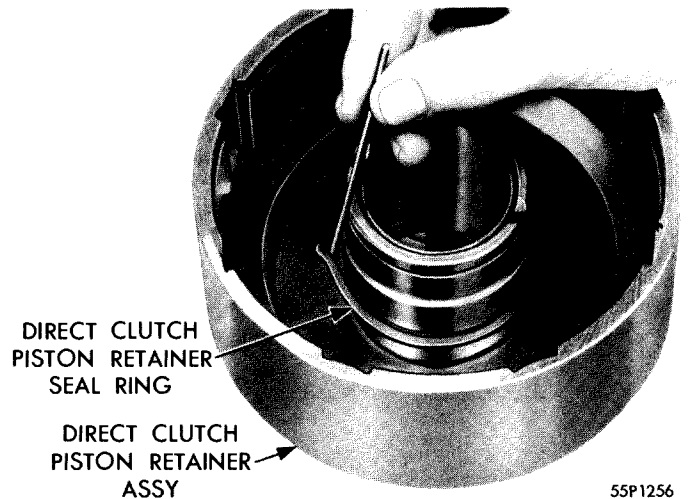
Removal or Installation of Piston Retainer Seal Ring
